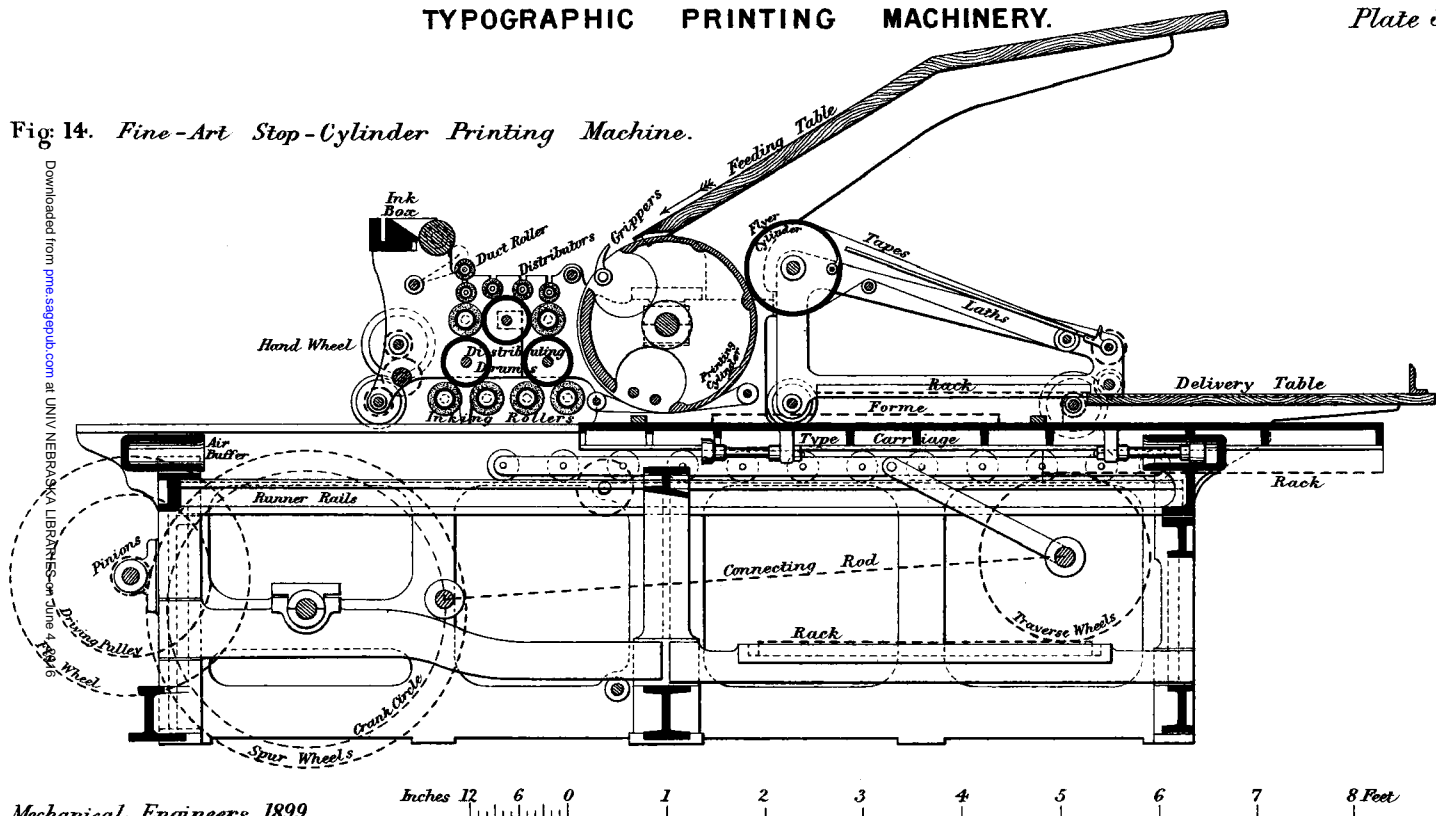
Fine-Art Stop-Cylinder Printing Machine
